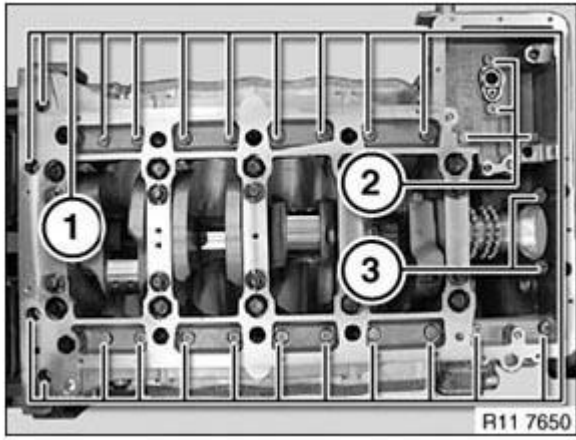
Identifying Fitting Bolts Tightening Sequence
